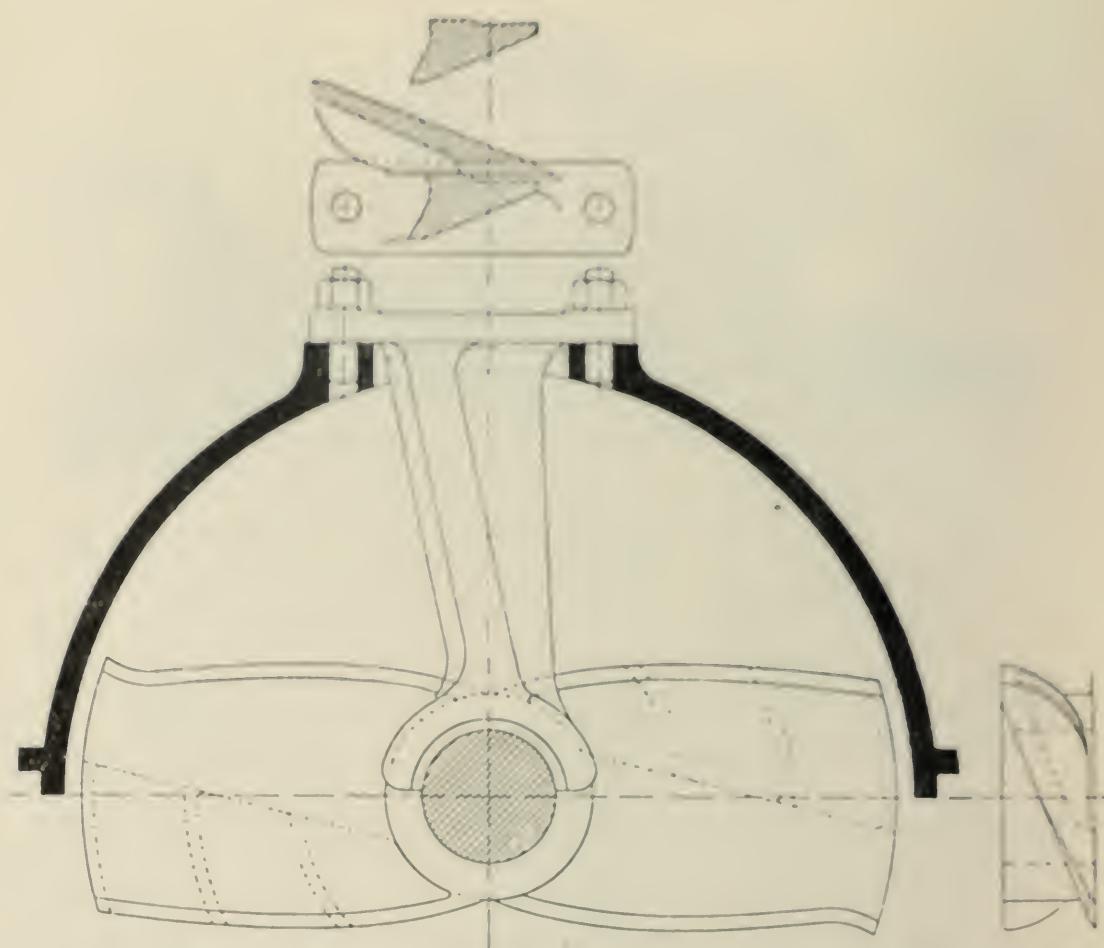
Rotating and fixed knives in the Anrep Peat Machine.
